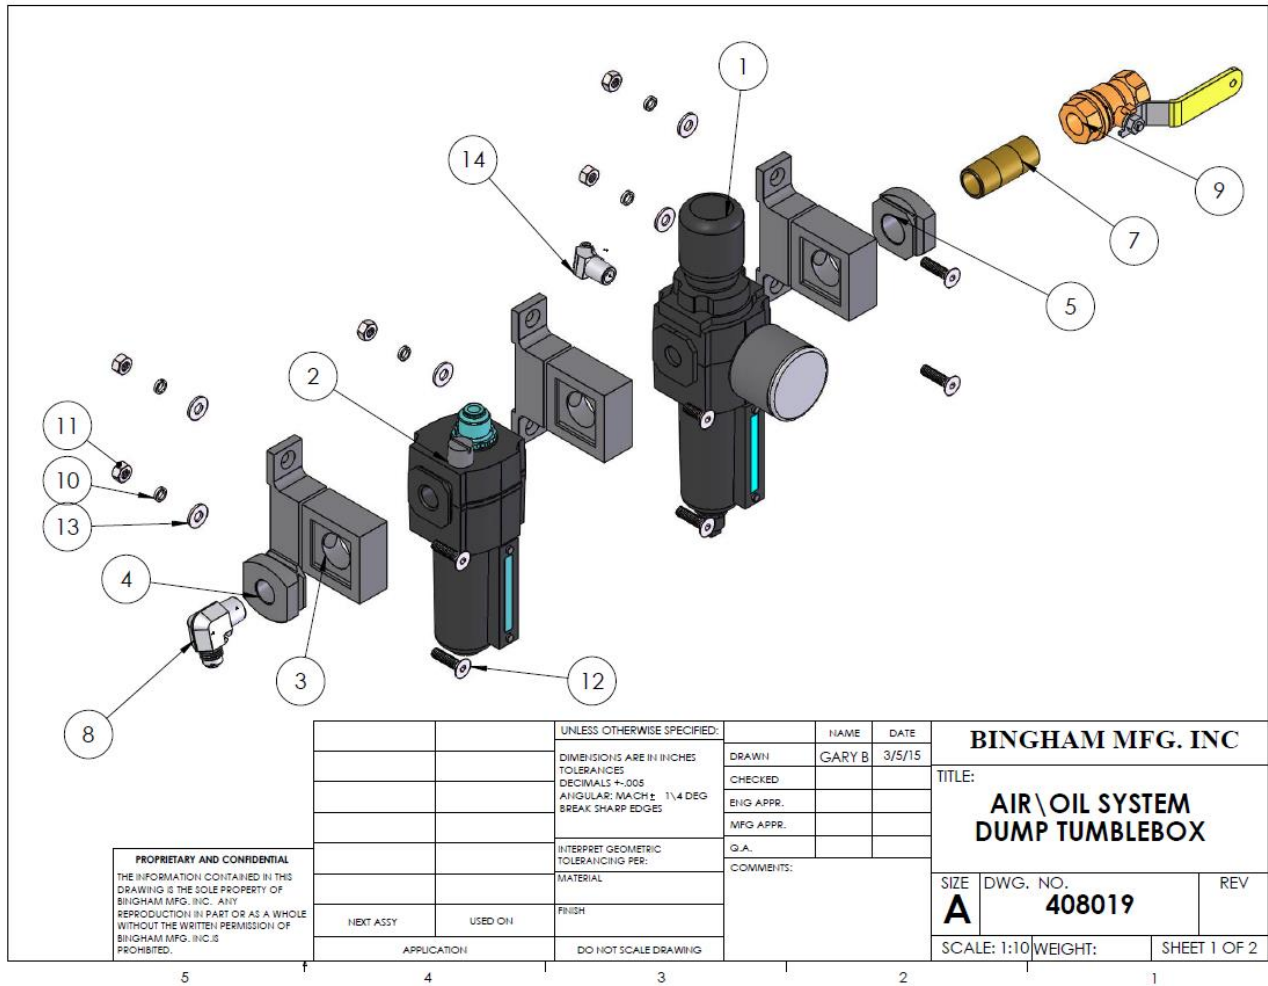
Drawing 408019 Air/Oil System Dump Tumblebox (Sheet 1)
